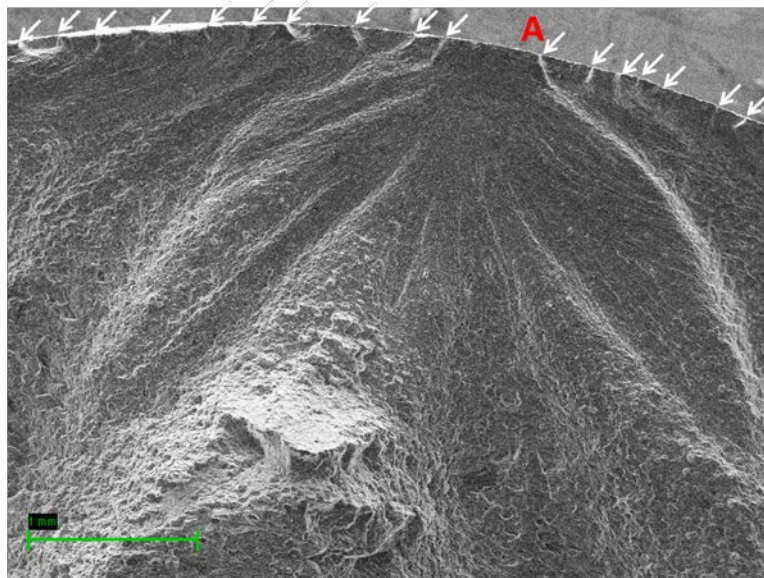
Fractograph of T6/Polished/Laser Shock Peened Test Specimen
